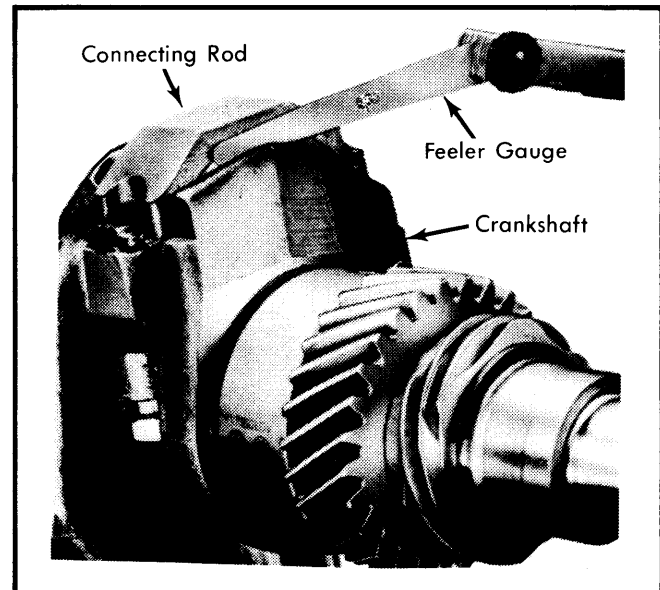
Using a Feeler Gauge to Check Connecting Rod Side Clearance
